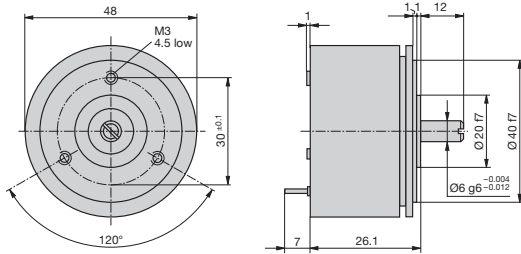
KINAX 3W2 with special drive shaft at front only, Ø 6 mm, length 12 mm.
